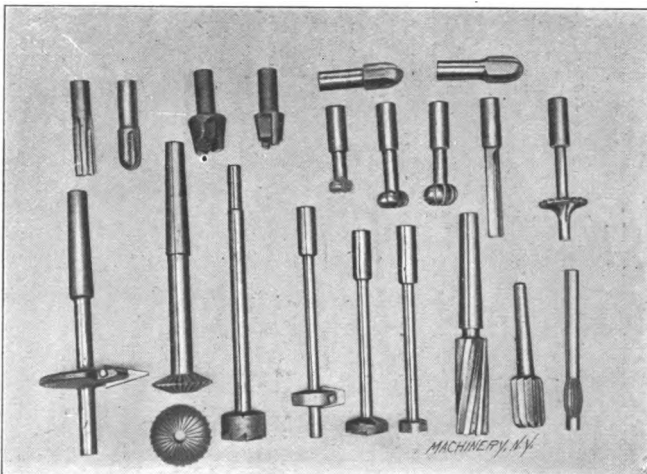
Milling Tools Used in Die-sinking, with Examples of Fly Cutters
